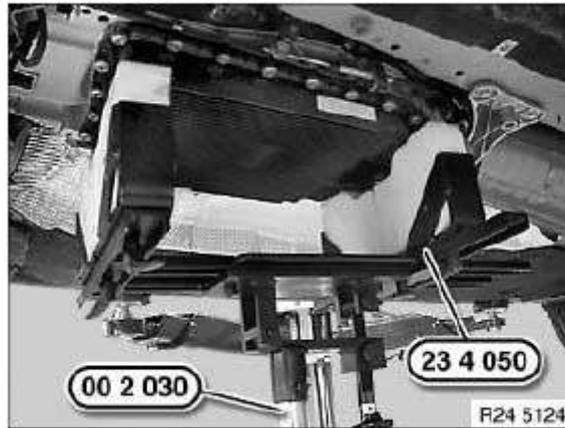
Supporting Transmission Using Special Tools (00 2 030 And 23 4 050)
